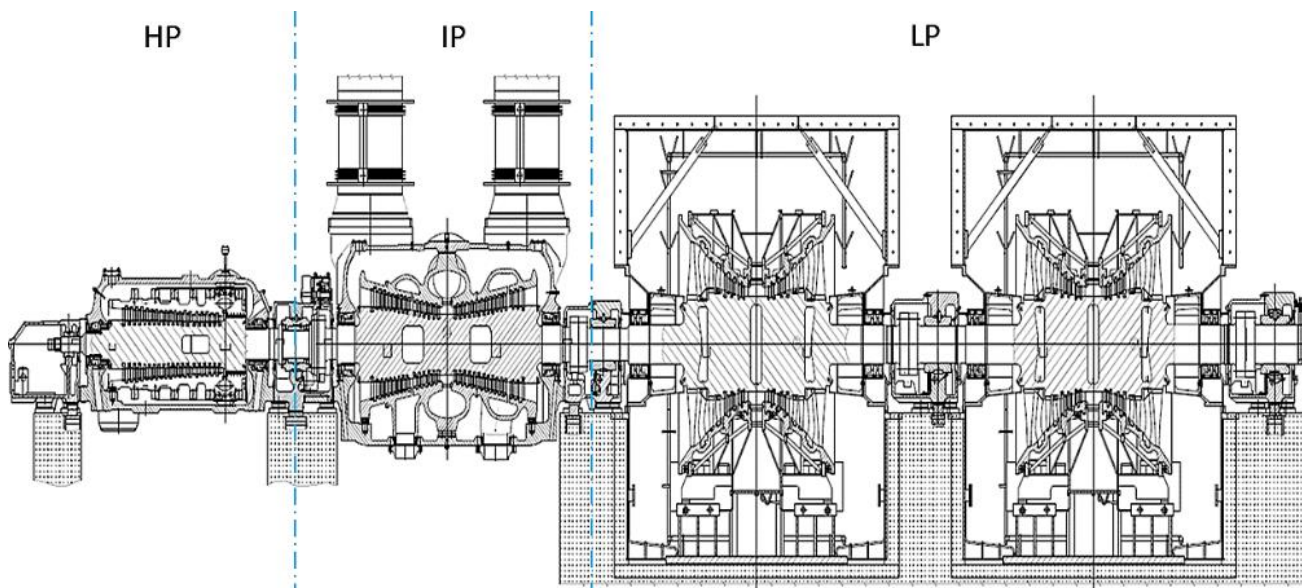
HP/IP/LP Steam Turbine Layout - Adapted from [6]
